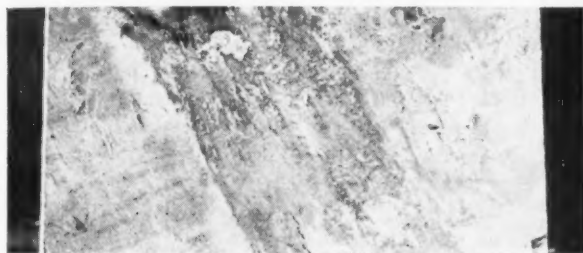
Discoloration caused by use of improper die lubricant. Extensive polishing is required to remove this so that plating will adhere.
